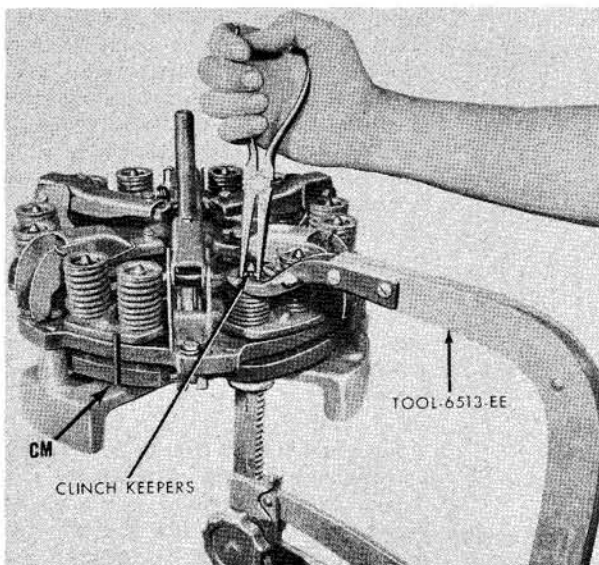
Use valve spring compressor to disassemble and assemble double clutch as shown. (CM) Correlation marks.
